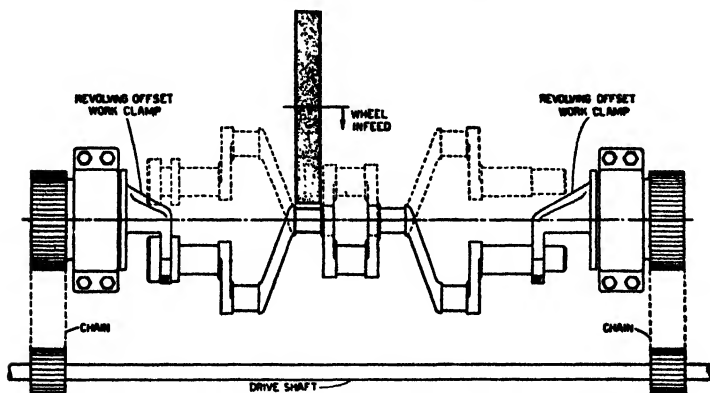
Crankpin grinding. (The Socony-Vacuum Oil Company)
